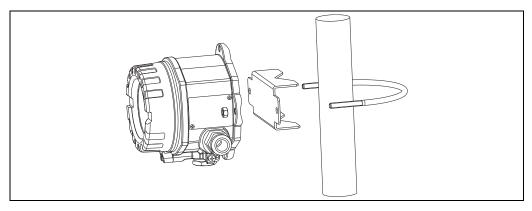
Mounting the field transmitter with the mounting bracket, see 'Accessories' section
